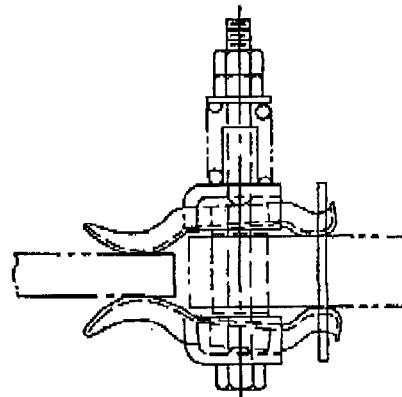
A. Primary disconnect assembly (for AK-50), Ref. No. 220.
